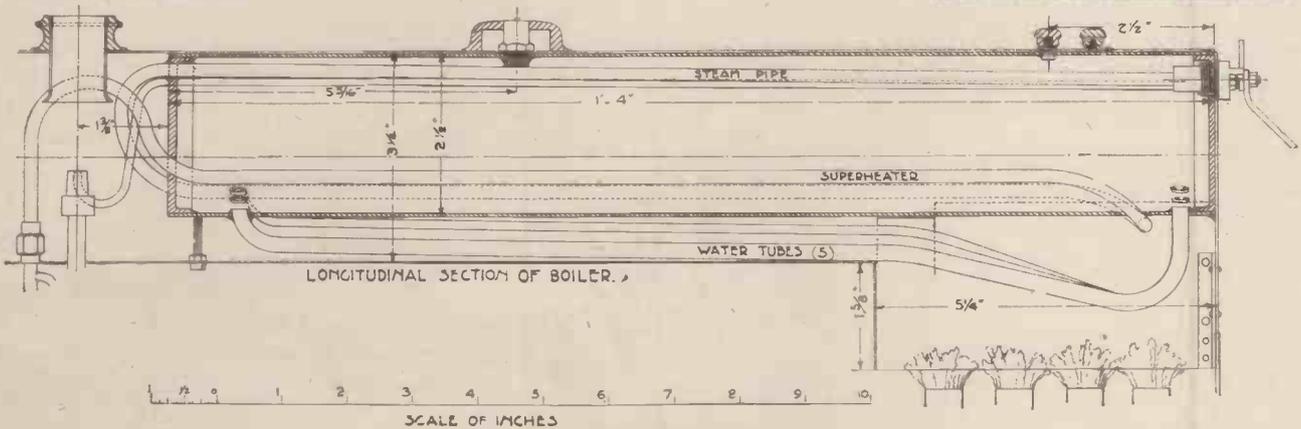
Section of inner boiler barrel and outer casing, showing water tubes, steam regulator and superheater pipe
